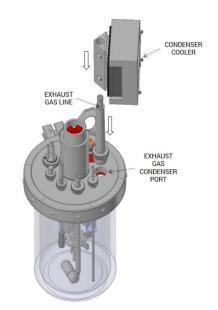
Exhaust gas tube and condenser cooler mounting
